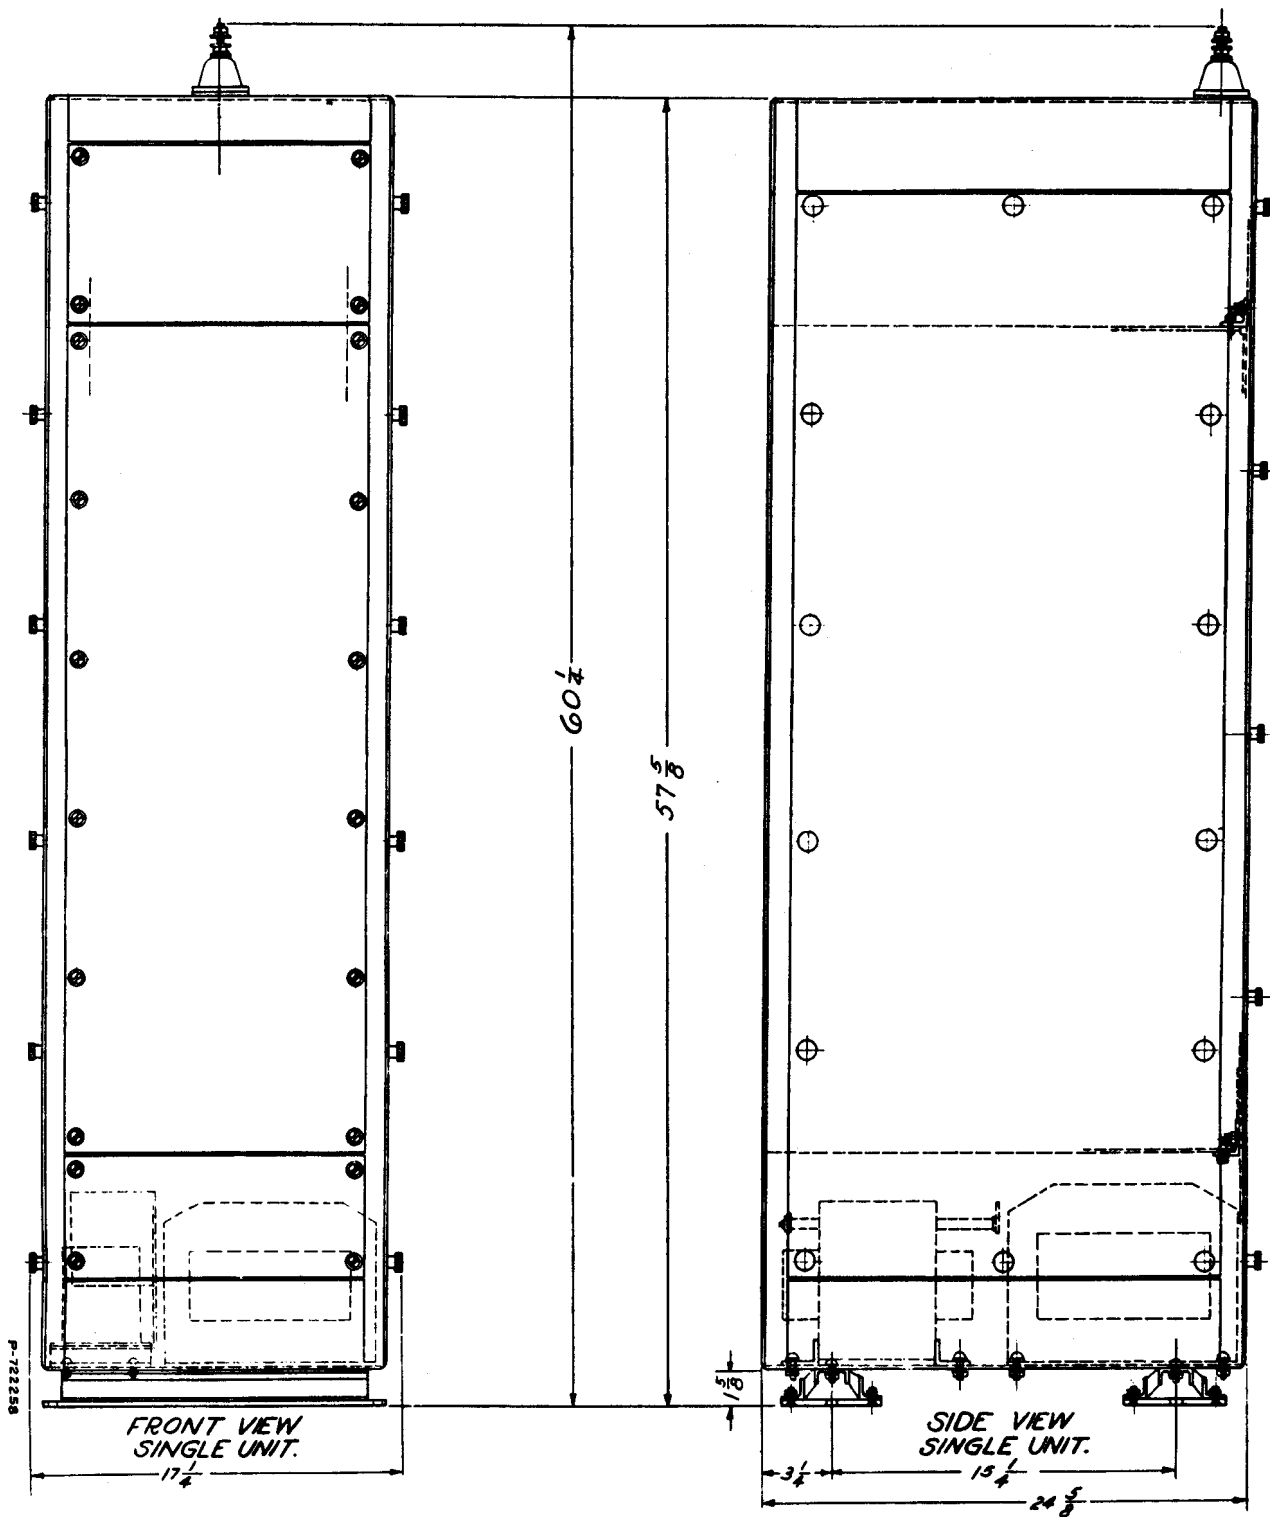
Transmitter Assembly (Outline Drawing P-722258)
